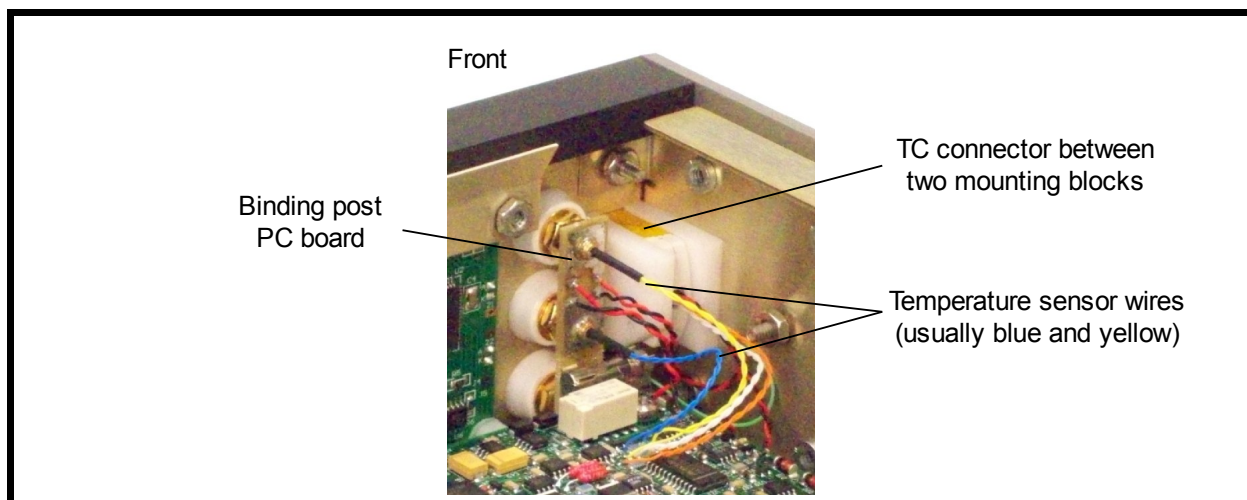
Binding Post Printed Circuit Board and TC Connector
